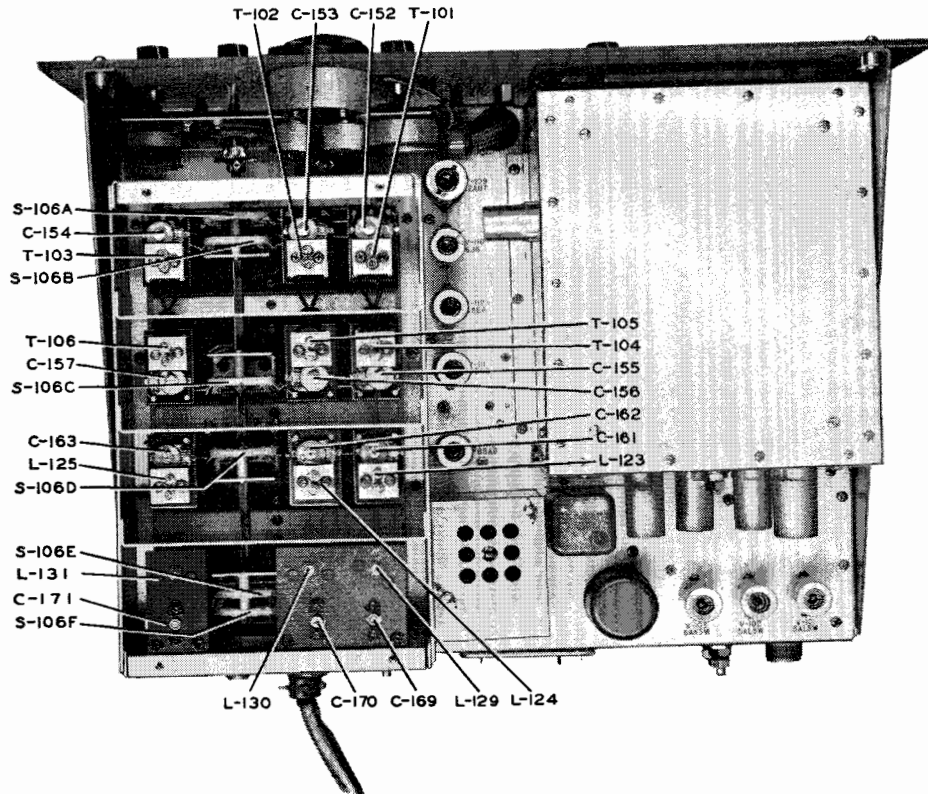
Keyer KY-30/GRT Parts Arrangement, Top View
